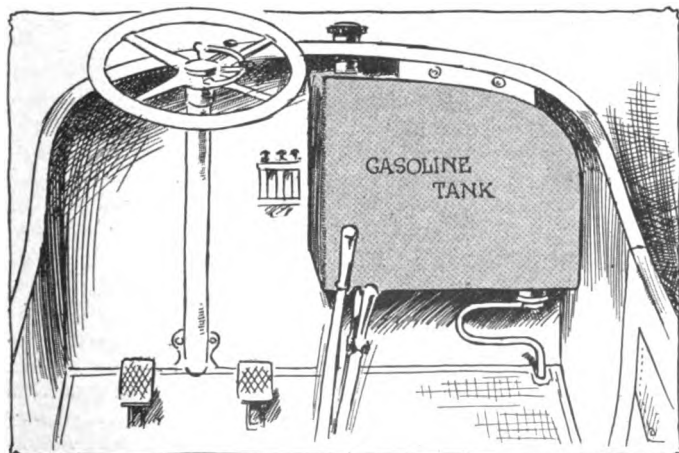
A neat method of mounting a gasoline tank under the cowl or overhang of the dash
